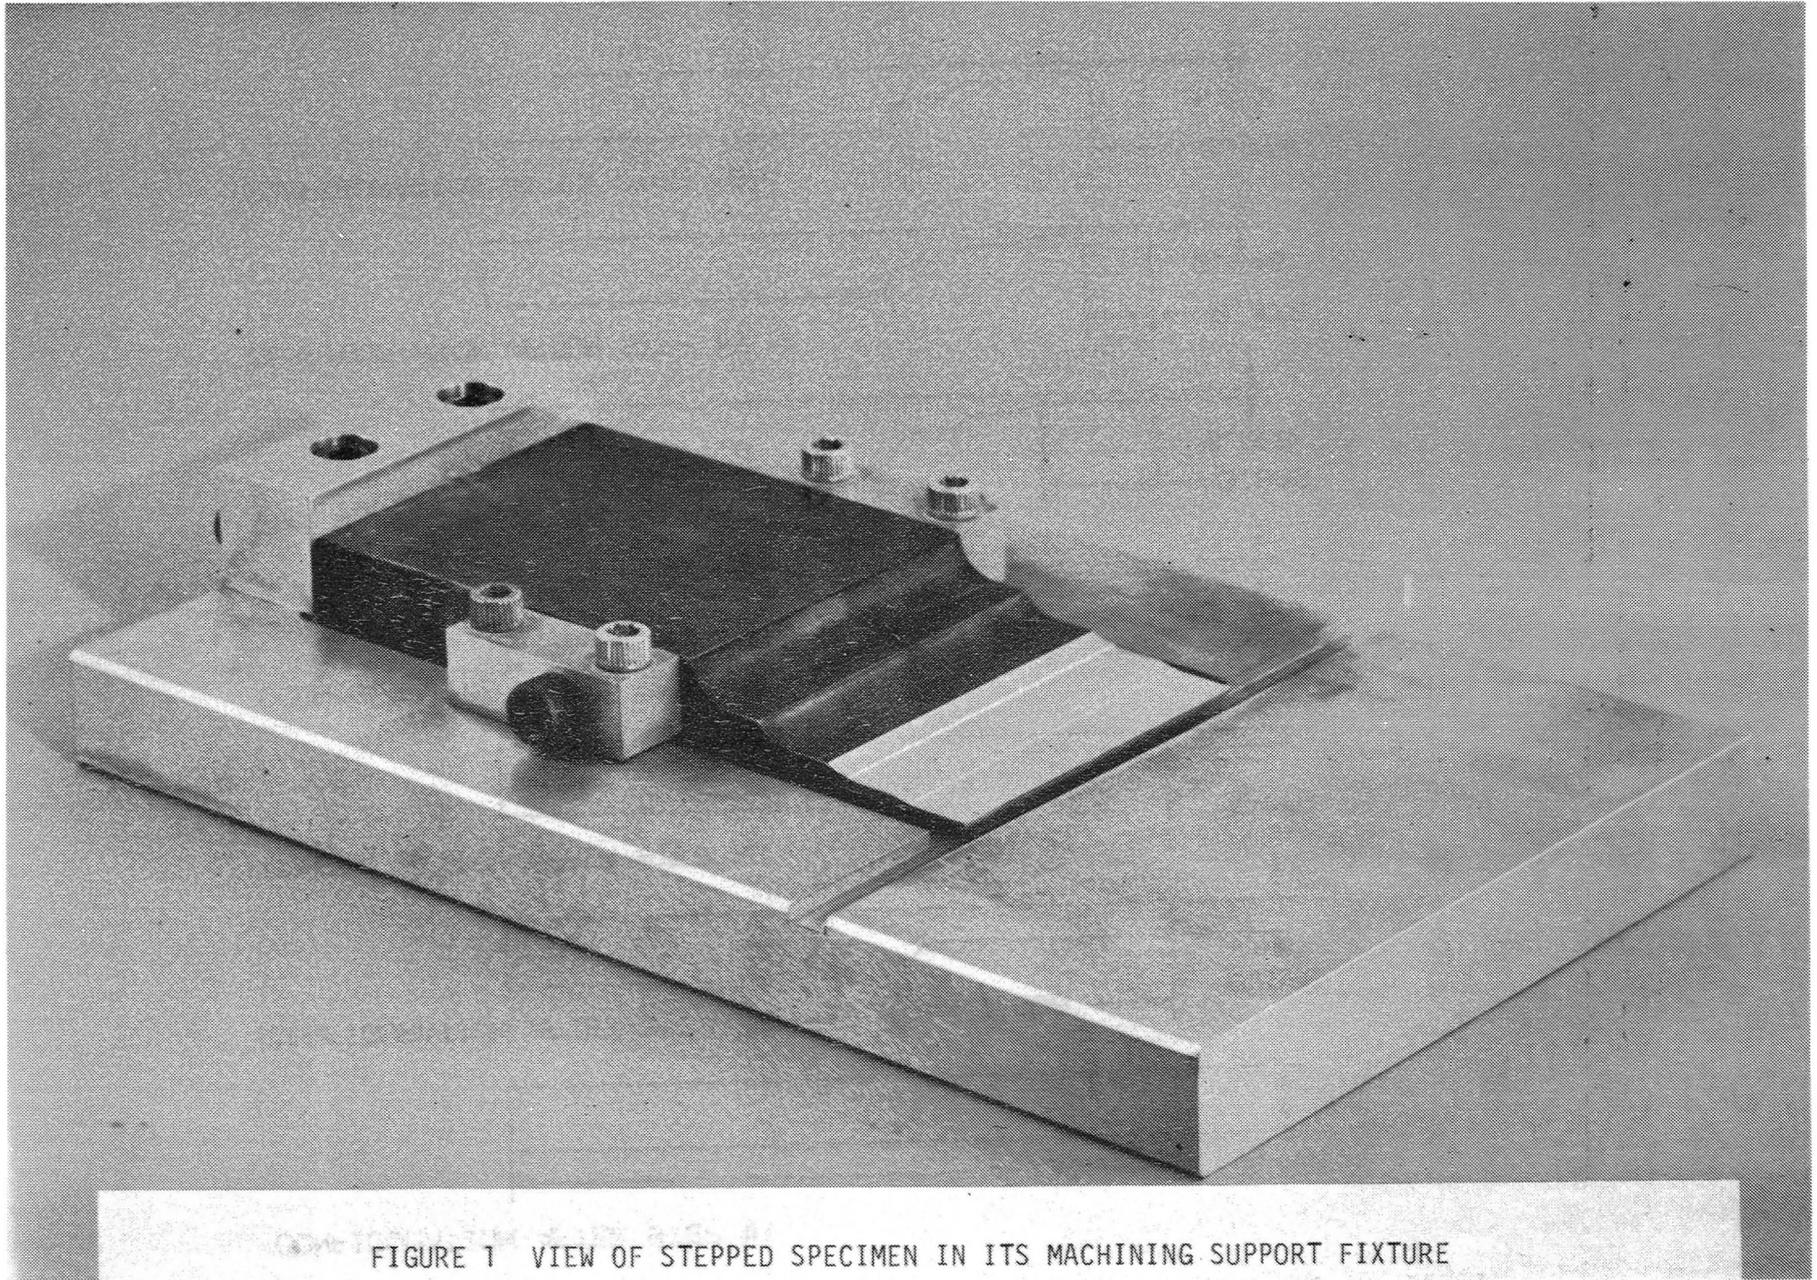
VIEW OF STEPPED SPECIMEN IN ITS MACHINING SUPPORT FIXTURE
